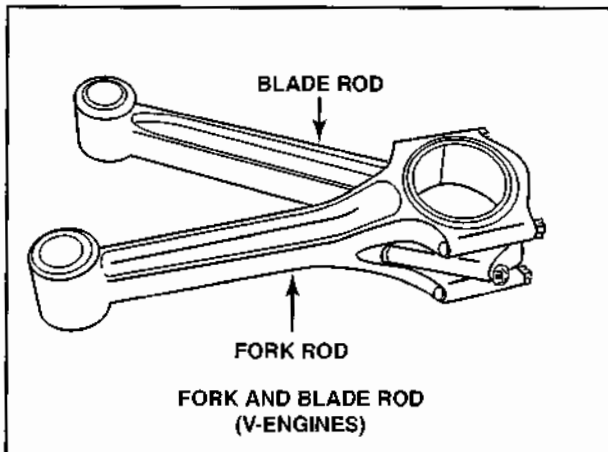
A fork-and-blade rod assembly used in a V-type engine consists of a blade connecting rod whose crankpin end fits between the prongs of the fork connecting rod.
